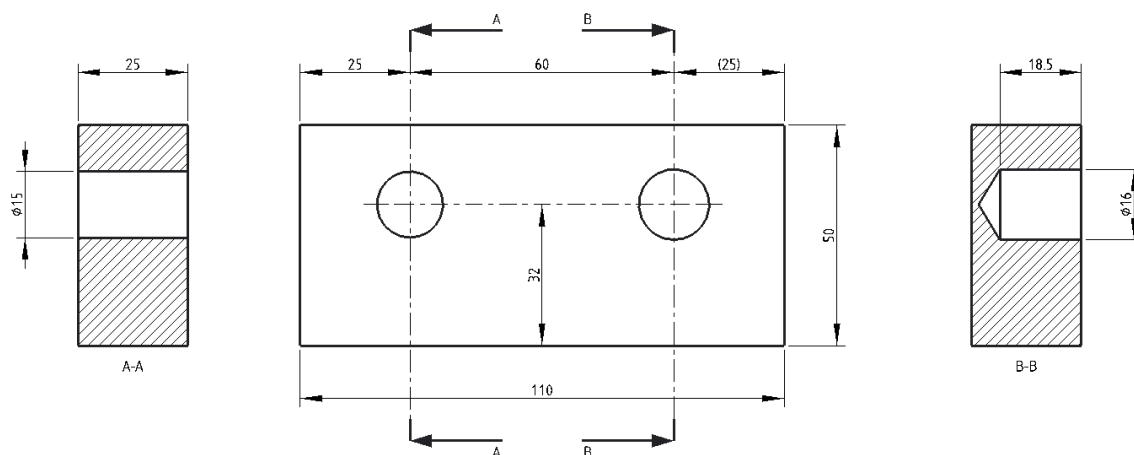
Example of sectional views (A-A and B-B), showing a through hole and a drilled hole.
